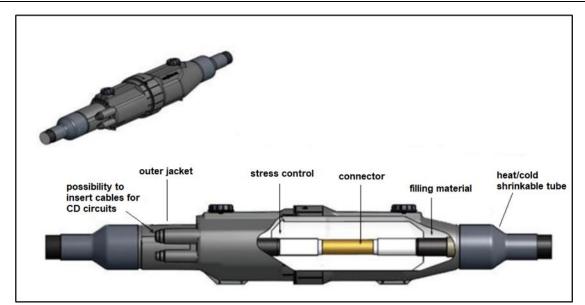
Cross-section of an exemplary cable joint [Source: Technical standard for the conditions of construction of electric power HV cable lines including cables and accessories, TAURON, 2018]
